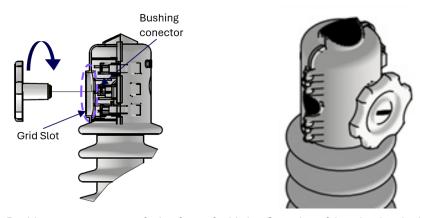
Bushing connector screw facing front of grid slot. Screwing of the wheel to the bushing connector.
